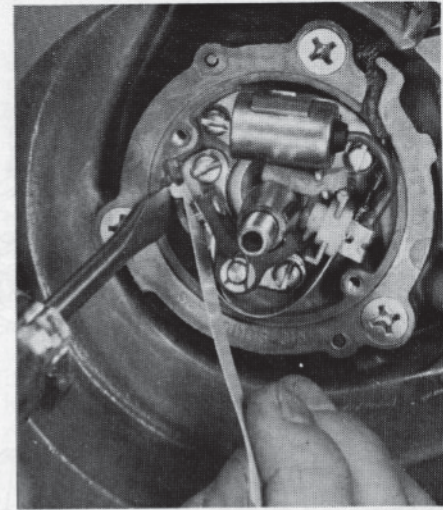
View showing magneto backplate, condenser and breaker point assembly. A pry slot is provided to facilitate breaker point adjustment. Late back plate has five retaining screws.
